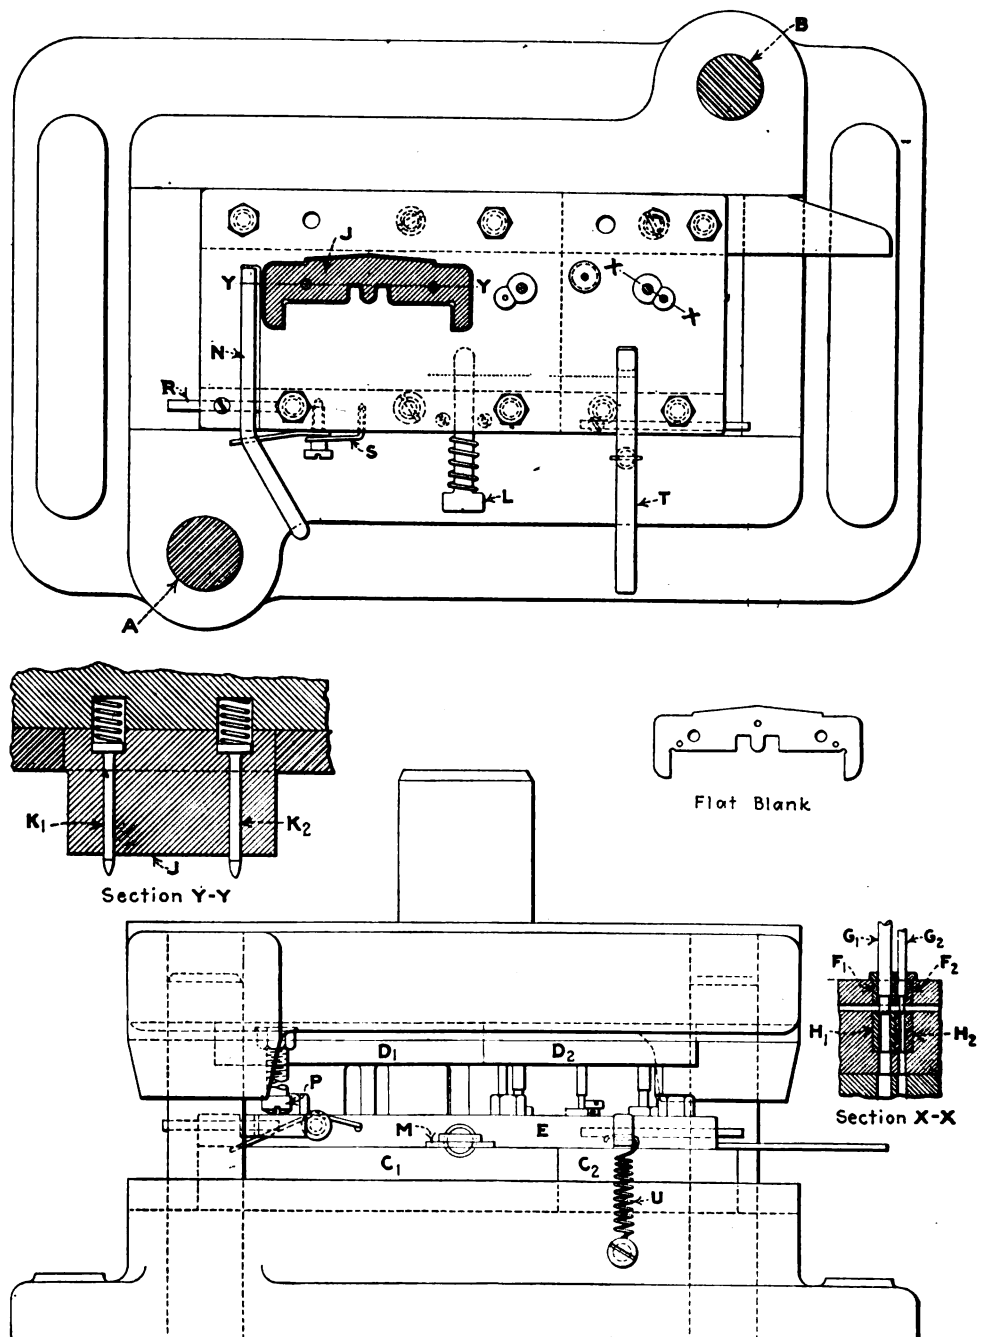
PLAN AND ELEVATION OF BLANKING AND PIERCING DIE
